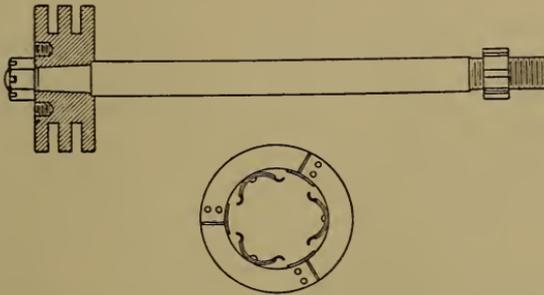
Piston, Piston-Rod and Piston Packing.
